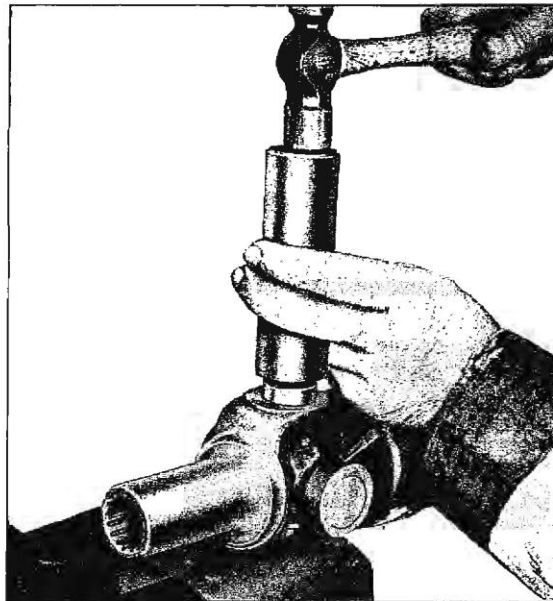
A-4 Removing Bearing From Splined Yoke Member
